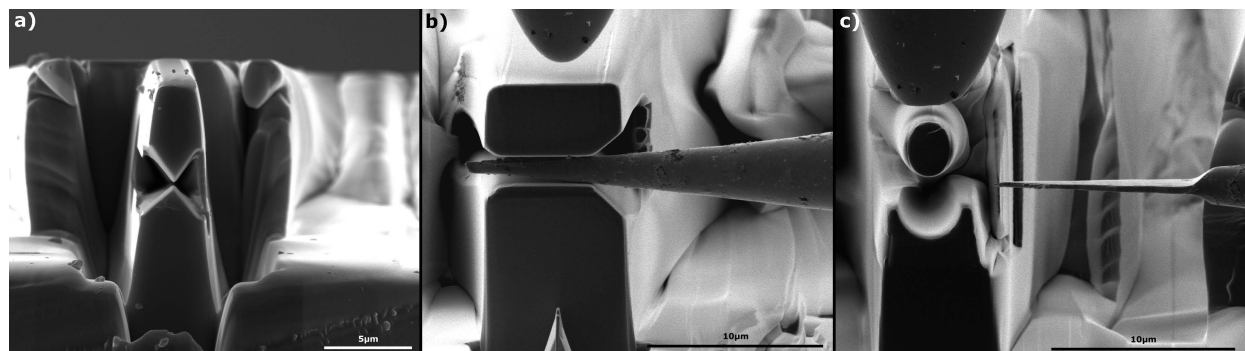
Scanning electron microscope images of different forging tools. Image a) shows a cutting tool, b) a freeforming tool and c) a bending tool.
